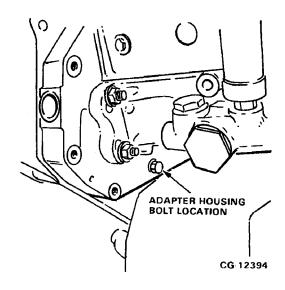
Remove Bottom/Rear (In-Board) Adapter Housing Bolt
